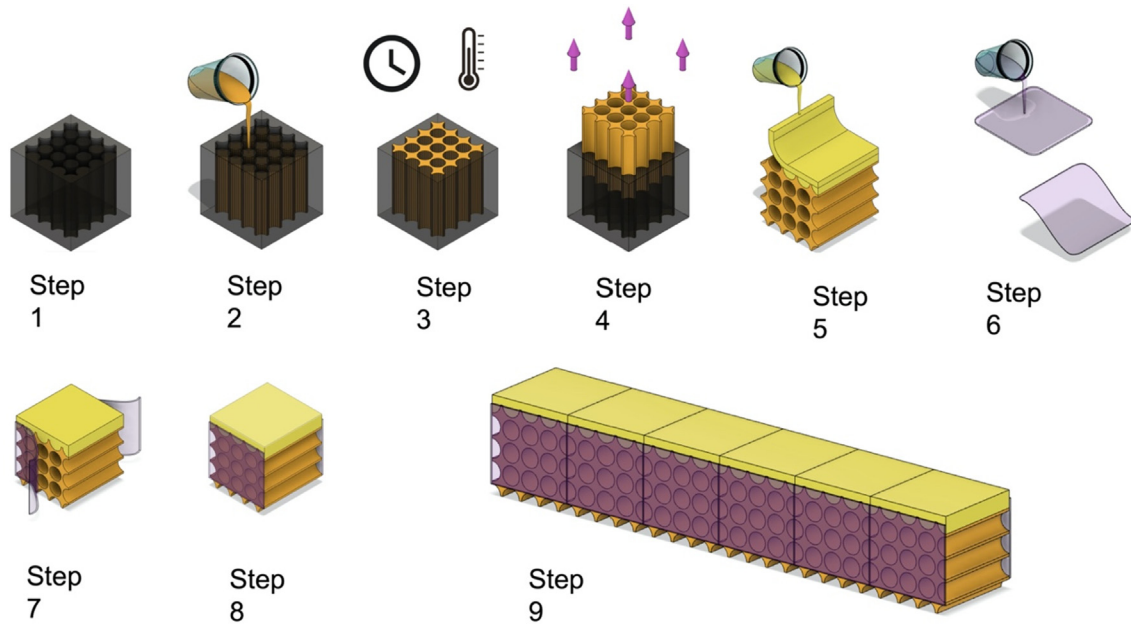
Design and construction of soft cubic buckling actuators and the resulting caterpillar robot. Step 1, 3D printed molds are fabricated for the lower and upper parts. Step 2, liquid silicone of shore 16 is cast on each mold. Step 3, molds are cured at room temperature for 40 min. Step 4, silicone parts are extracted from the molds. Step 5, the upper layer is glued back-to-back using liquid silicone of shore 32. Step 6, a thin one-millimeter membrane of silicone of shore 8 is produced by spin coating liquid silicone. Step 7, this layer is then glued to the lateral faces of the cube. Step 8, a thin silicone tube was introduced on the top part of each module. The deflation chambers are all connected to this silicone tube using an internal cut serving as a pneumatic link between cavities. Step 9, the entire robot is assembled by gluing together the modules in an arrangement of six modules.
